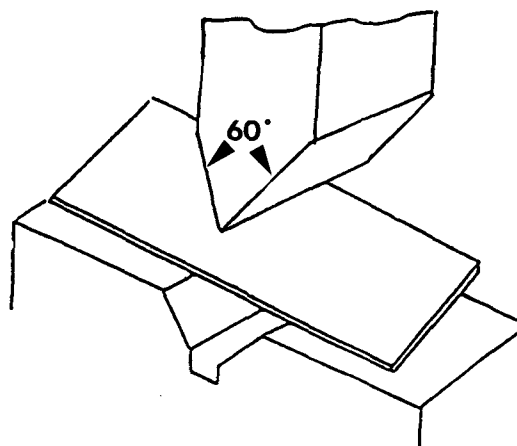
Schematic drawing of the 60 deg bend test die configuration.
